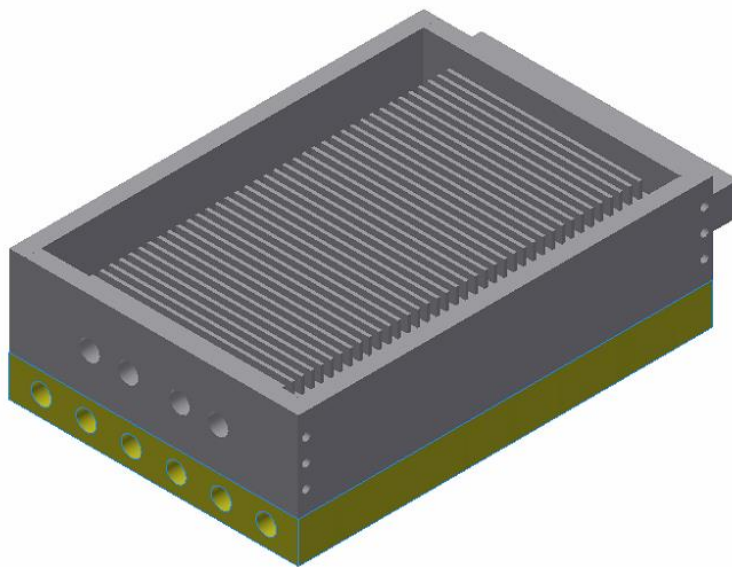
CAD drawing of the heating plate attached to the bottom of the tray
